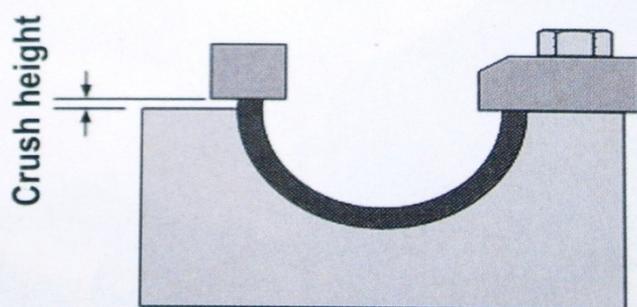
Bearing shells are slightly taller than their supporting saddles.
